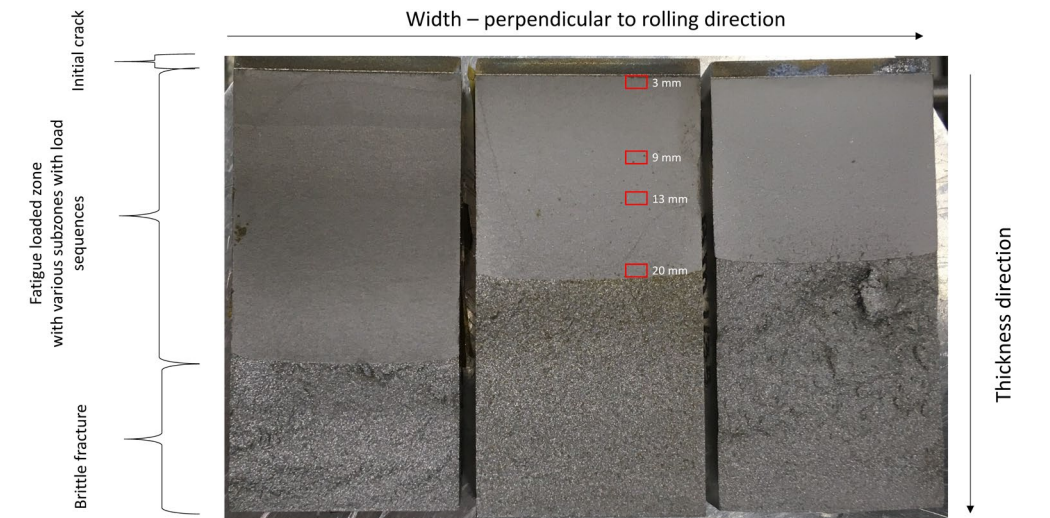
Fracture surfaces of three base material specimens, BM0835, BM1035 and BM1135
